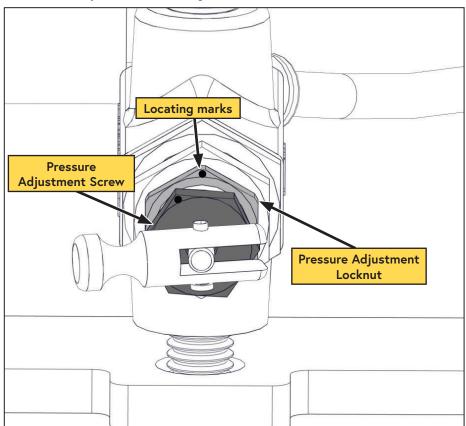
Adjusting the Unloader Valve (engine base plate removed for clarity)
